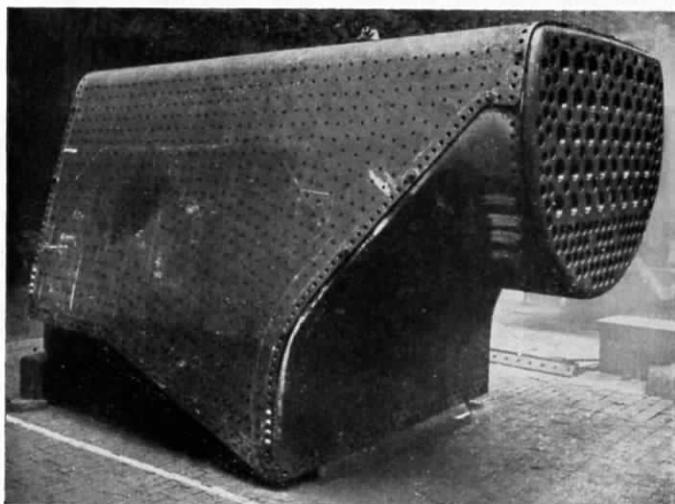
COMBUSTION CHAMBER FIREBOX, 4-6-2 TYPE ENGINE, L.M.S.R.
